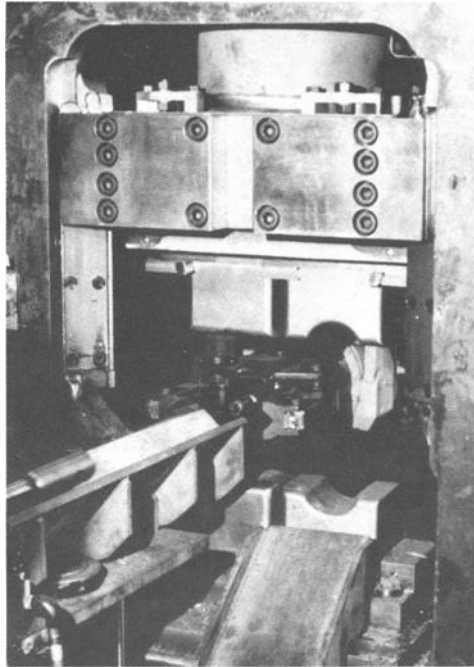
Billet entering automatic preform press.* (Courtesy of Schirmer-Plate-Siempelkamp Hydraulic Presses.)
